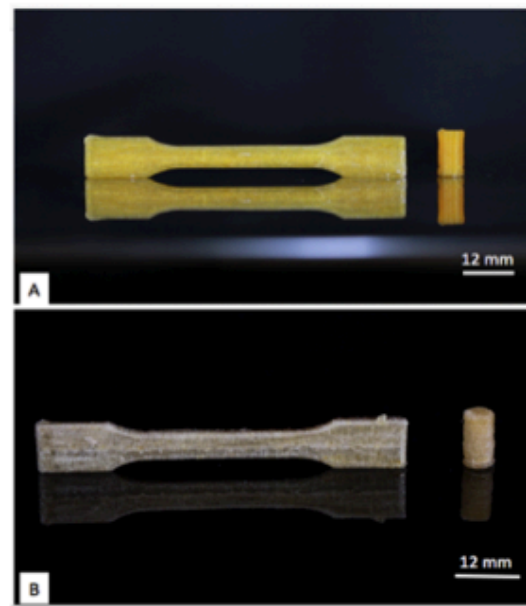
Printing PLA constructs. (A) MTX-PLA mechanical testing samples, (B) GS-PLA mechanical testing samples.
